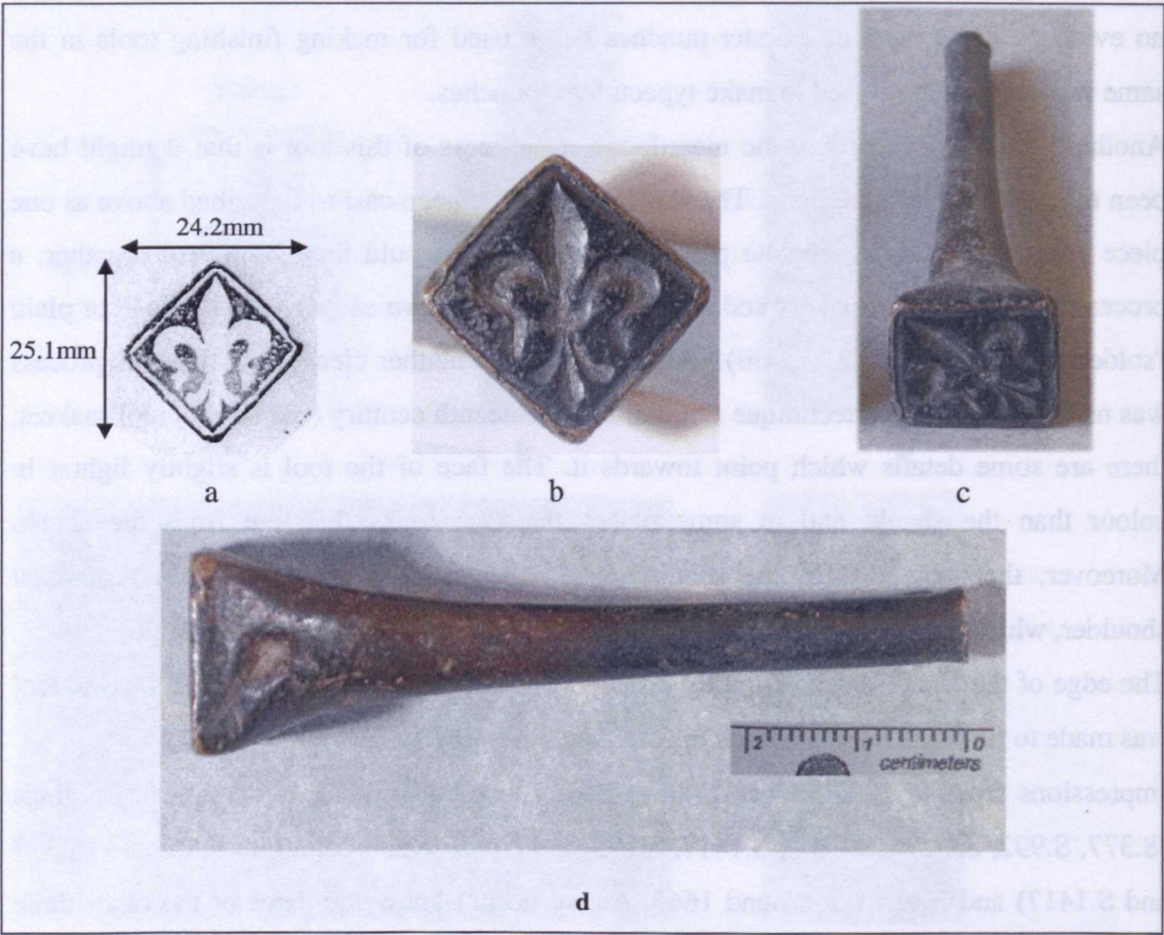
Tool 5: a) actual size ink proof, b) photograph of face, c) perspective view, d) side view
